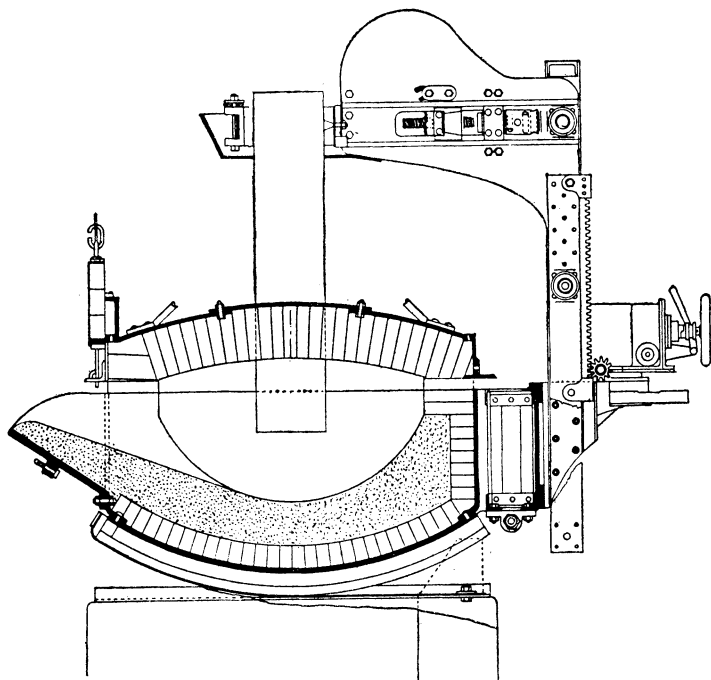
Sectional elevation of 2.5-ton, single-phase Héroult steel furnace, La Praz, France.
